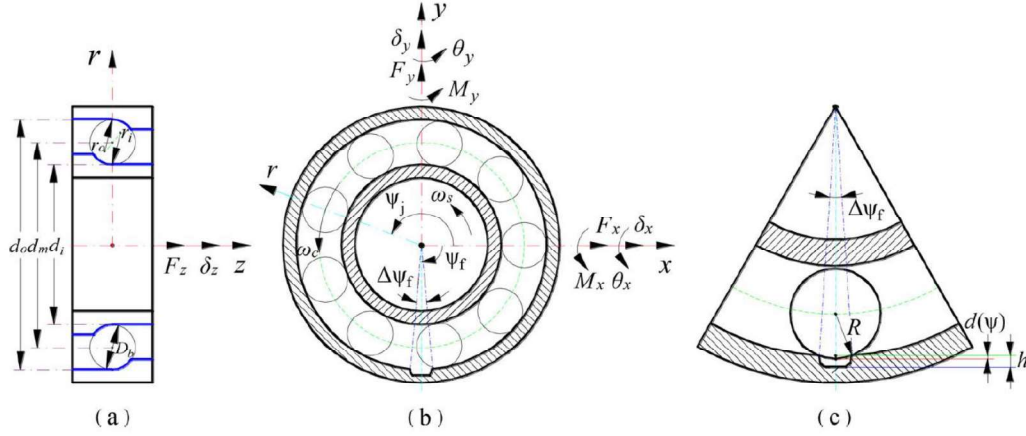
Coordinate System of The Bearing to Define Relative Rotations and Displacements; (a) Radial Section View, (b) Axial Section View And (c) Enlarged View of Defect [71]
